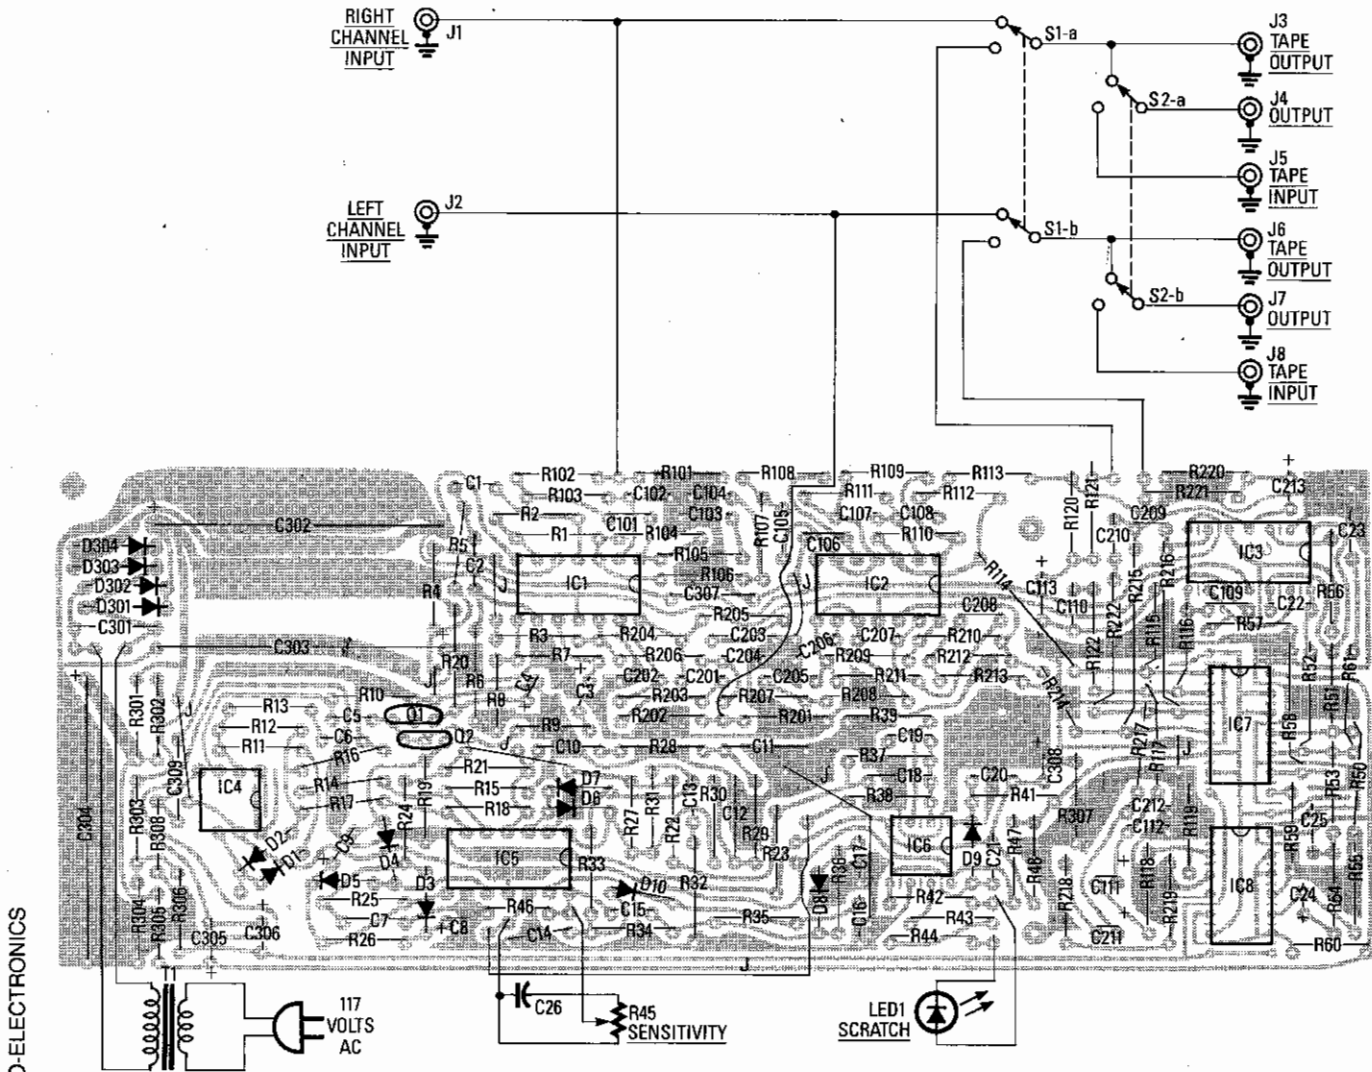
STUFF THE PC BOARD and wire the front-panel components as shown here. Resistors R114, R222, R215, R216 must be bent as shown in Fig. 10.
